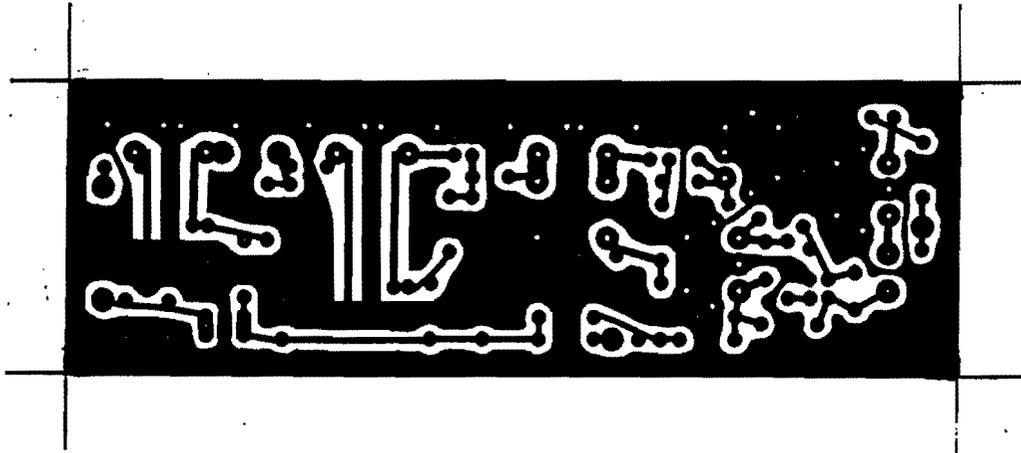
VCXO PCB (0.8mm single-sided FR4).
